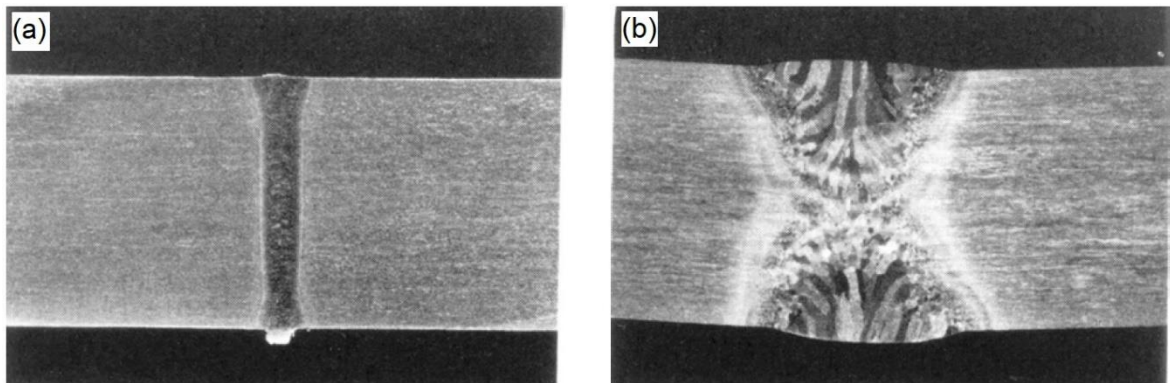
Differences in the cross-section area of two weld zones produced by (a) A narrow WZ by electron beam welding (EBW) While (b) shows a wide FZ achieved by GMAW process (GTAW)[67].
